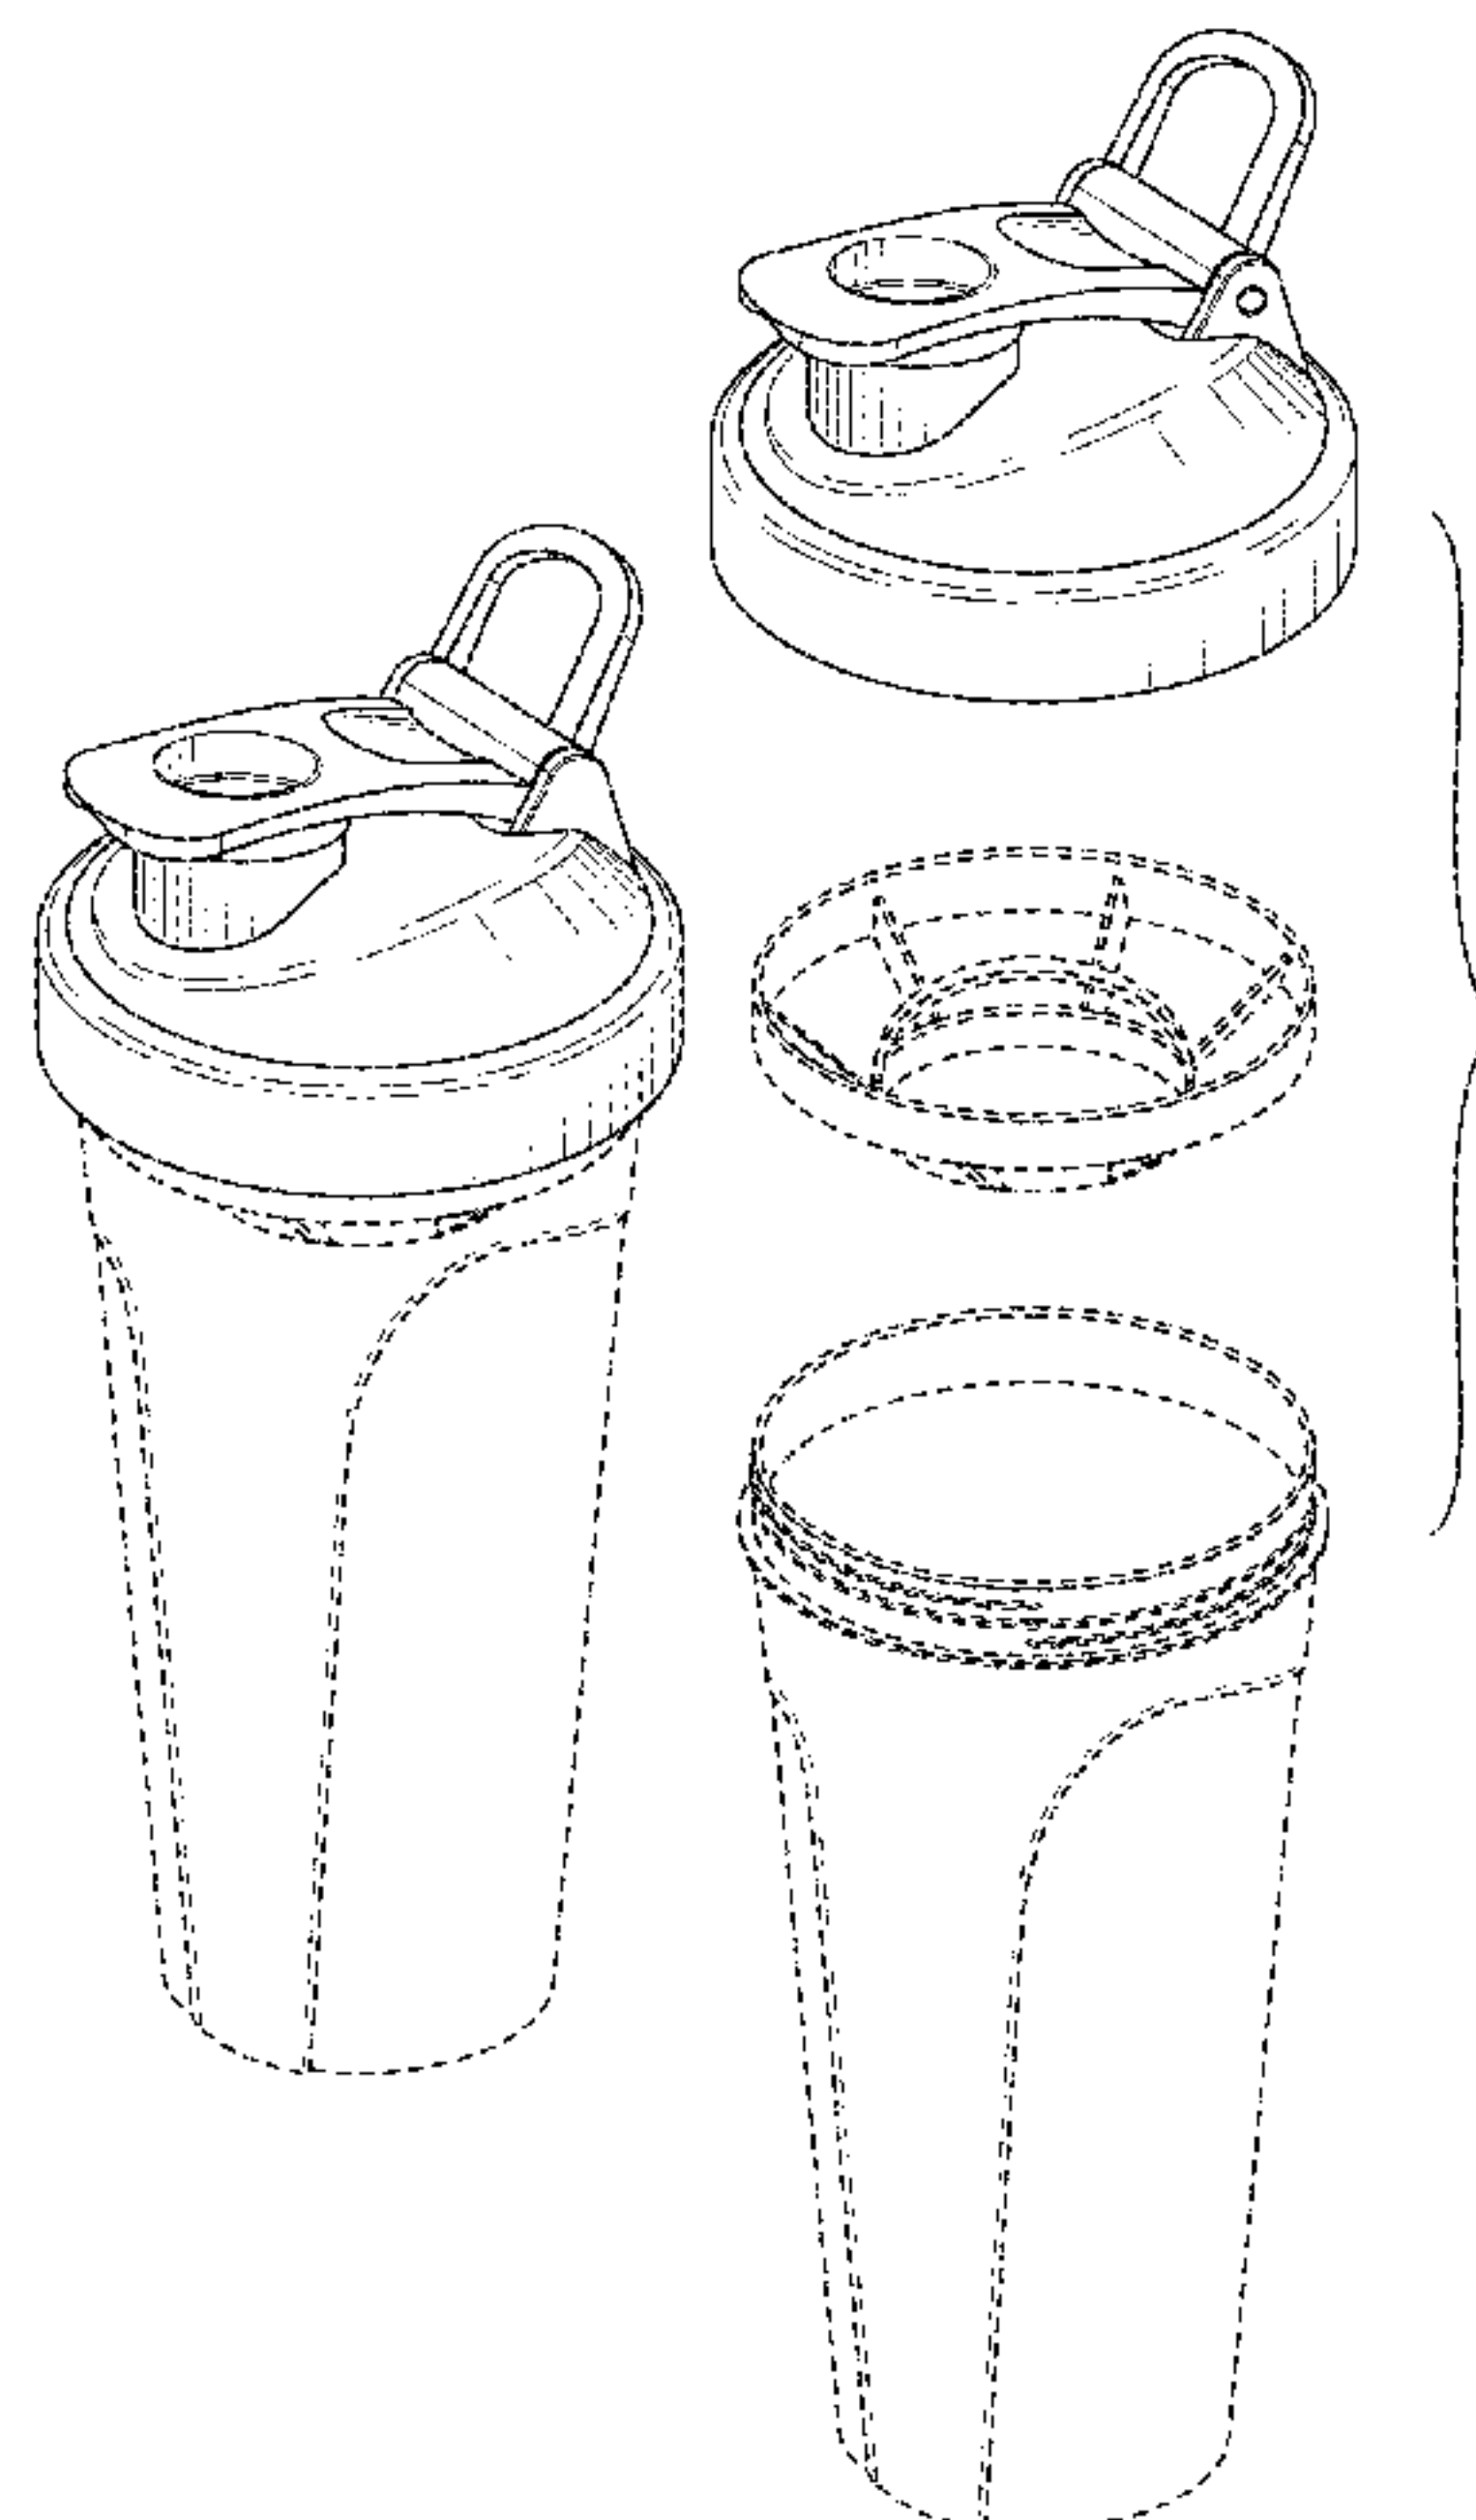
is an exploded left-side elevational view of FIG. 1;
